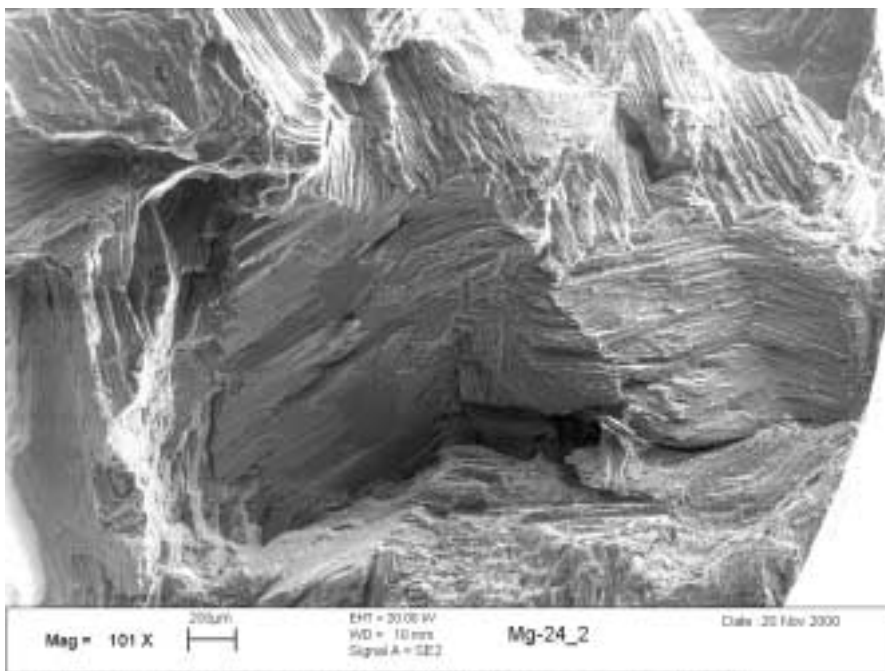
Fracturegraph of the 16 mm diameter sample after 8 h of aging at 210°C
